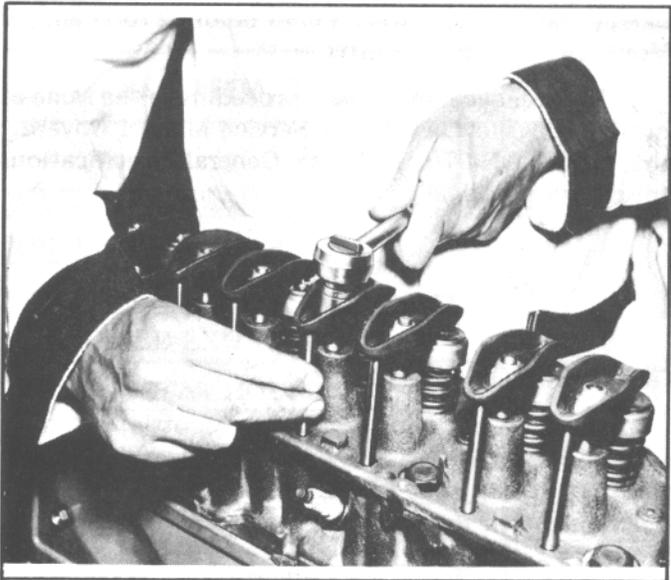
Adjusting Valve Clearance 292 In-Line Six
